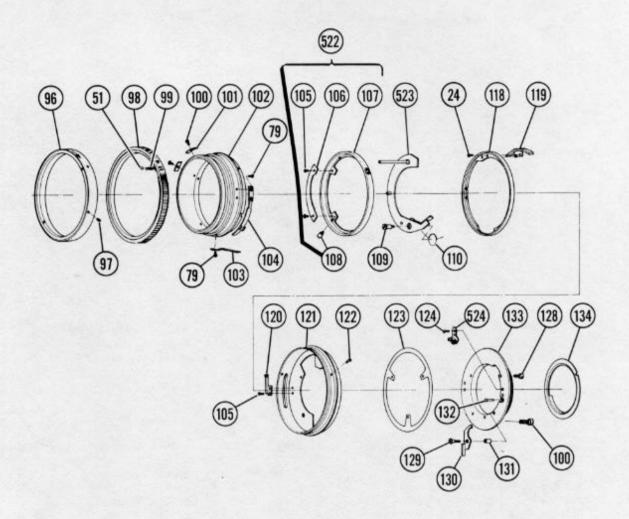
Mount Assembly, Universal (Ref. 547, Pg 58)
